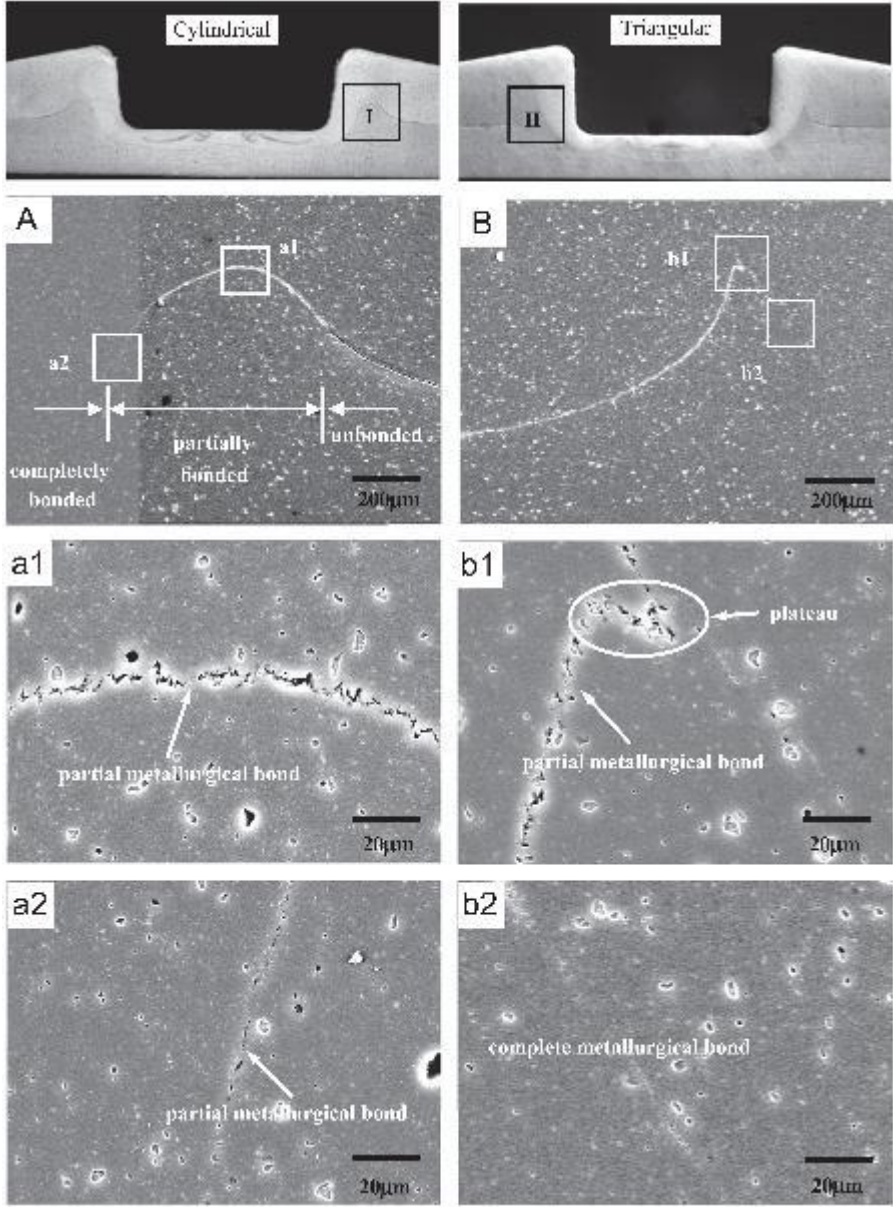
Cross-sectional macrostructure of the welds obtained with a cylindrical tool (left) and a triangular tool (right). (A) hook defect in a region I in weld obtained with the cylindrical tool; (B) hook defect in region II in weld obtained with the triangular tool; (a1) and (a2) partial metallurgical
